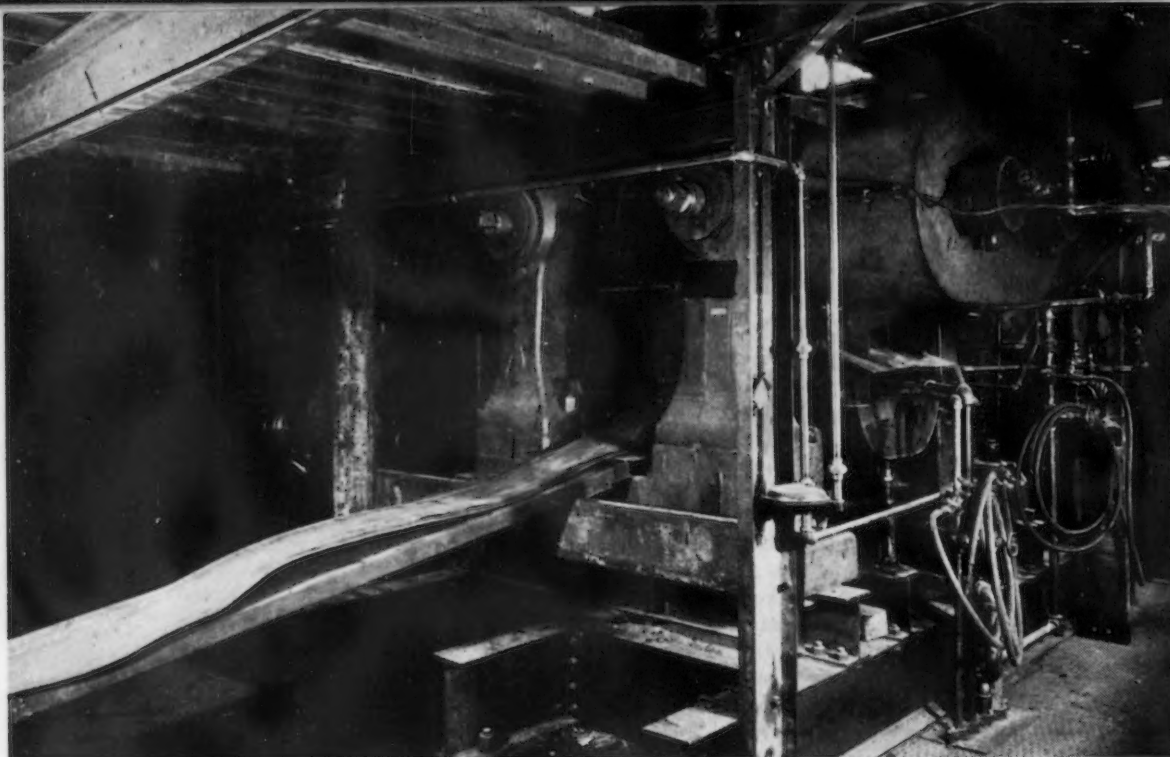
The delivery end of a brass casting and rolling machine which is now in daily commercial operation. This unit turns out about 200 lb per minute of 12-in. brass strip 0.150 in. thick. The metal is poured into the rolls from the platform above, as shown in Fig. 4.
